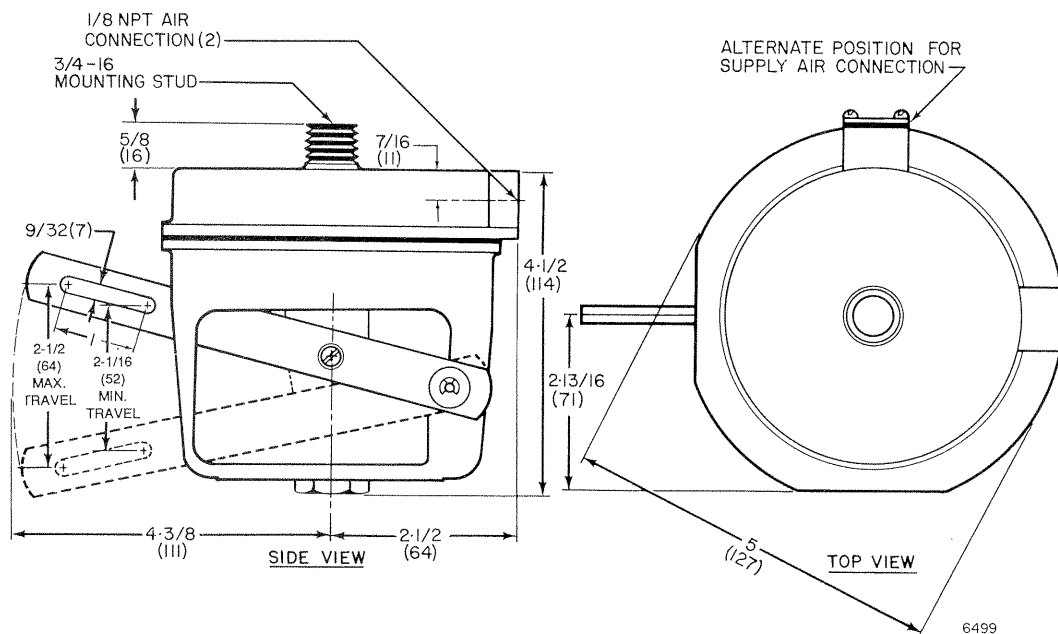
MP516A Approximate Dimensions in Inches (Millimeters).
